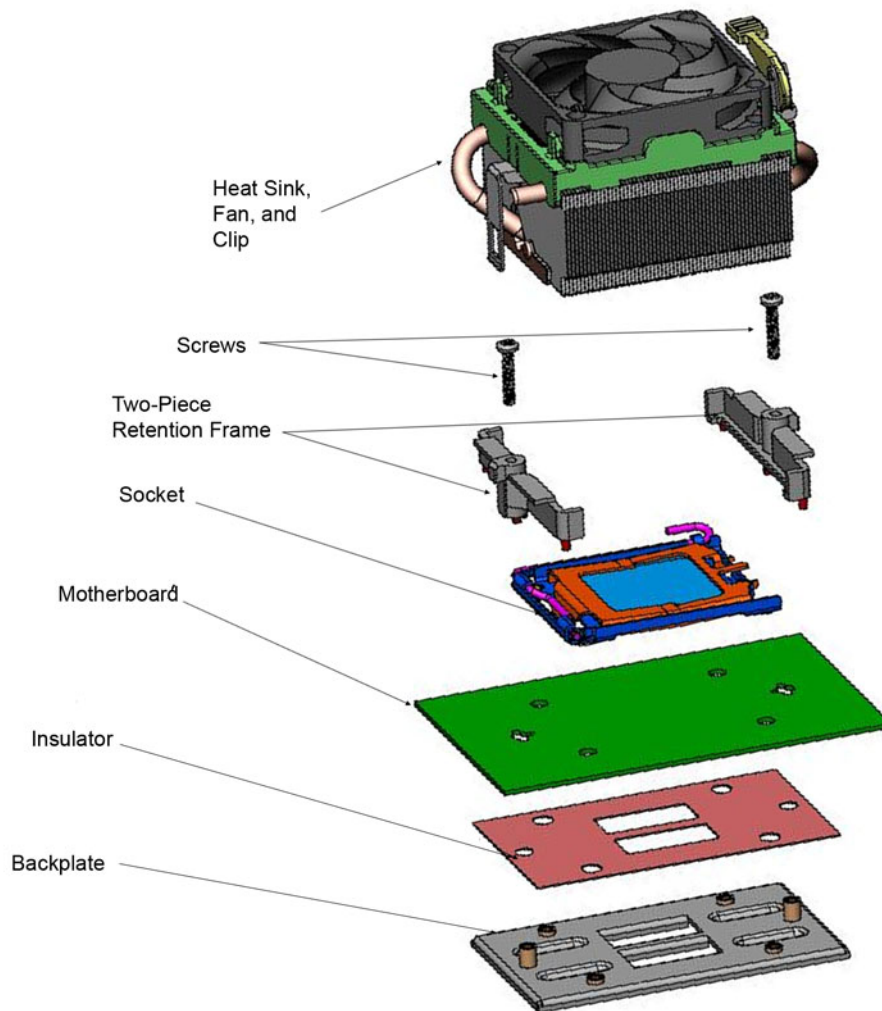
Exploded View of Thermal Solution AMD PIB Platforms based on Socket F (1207) Processors
